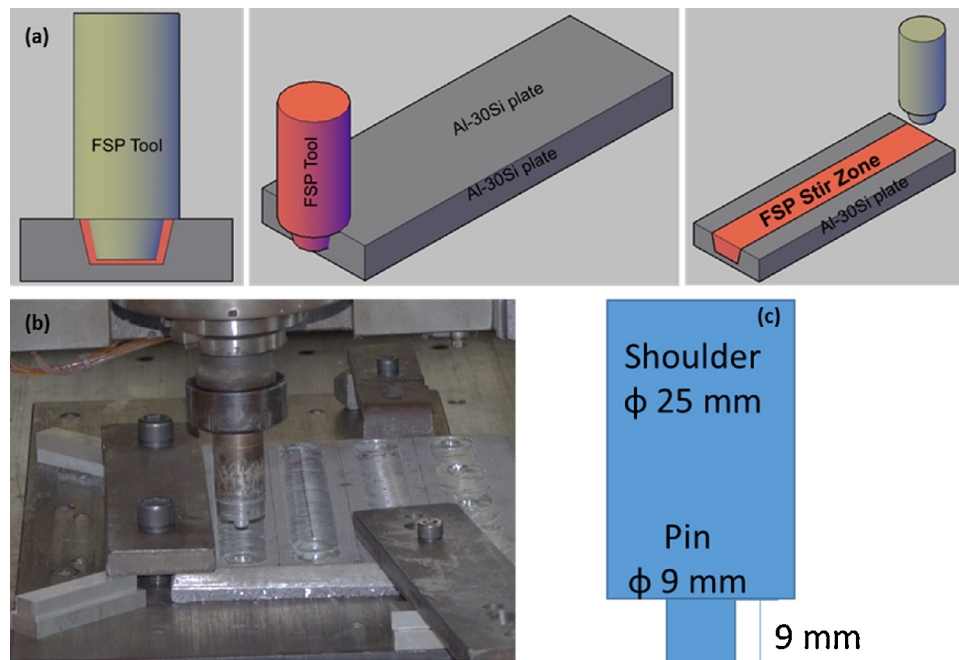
(a) Schematic representation of FSP showing FSP tool insertion and translation thus creating refined FSP zone, (b) FSP setup showing FSP machine, tool and Al-30Si plate clamped on machine bed, and (c) tool profile used for carrying out FSP.
